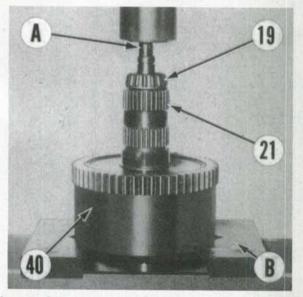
Support clutch housing (40) and press output shaft out of rear bearing cone (19) to separate shaft from splined spacer (21) and clutch housing.
